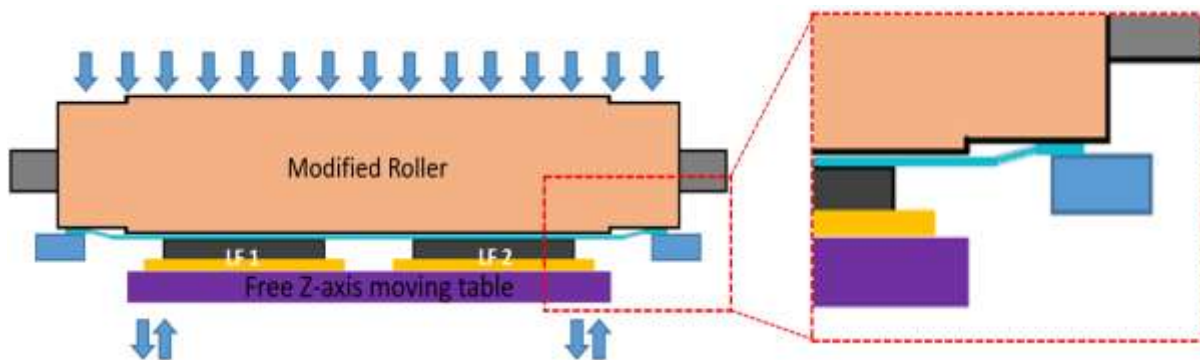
New Modified Mounting Roller design to compensate constant pressure on thinner packages.
